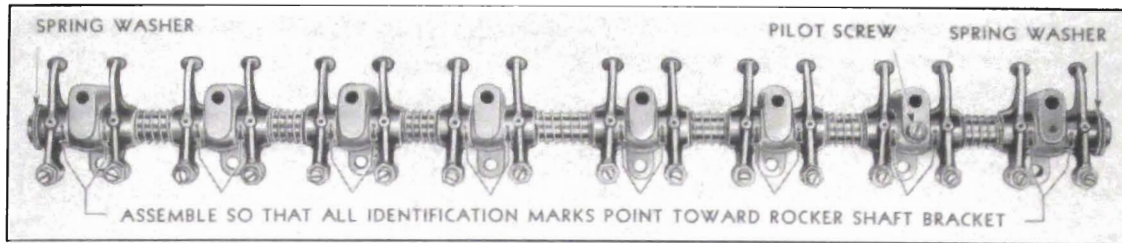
Rocker Arm Shaft Assembly—Series 40-50
